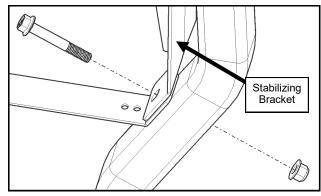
(ROPS Bolt to Stabilizing Bracket)
